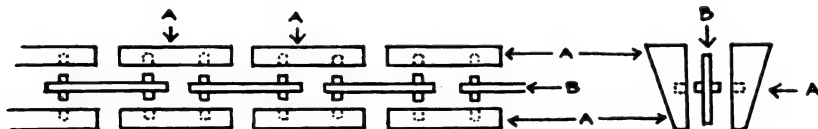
WHITTLE BELT. REALLY A "CHAINBELT" THE CORE CONSISTS OF STEEL PLATES WITH PROJECTING RIVETS, LEATHER PADS COUPLE THESE STEEL PLATES TOGETHER, THE PADS BEING DRILLED TO ACCOMODATE THE RIVETS. WOODSCREWS COUPLE THE SIDE PADS (A-A) TOGETHER, BEING PASSED BETWEEN THE STEEL PLATES (B-B).
